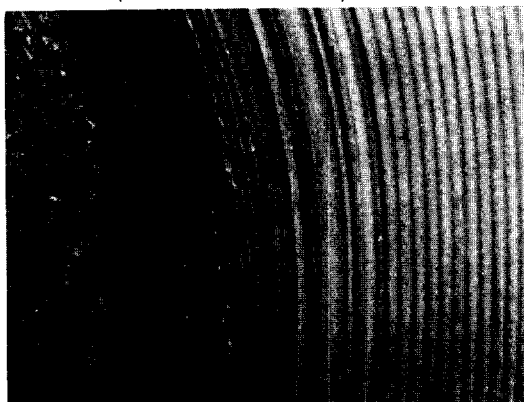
Flash formed by friction welding of Al/Cu(C-3)
